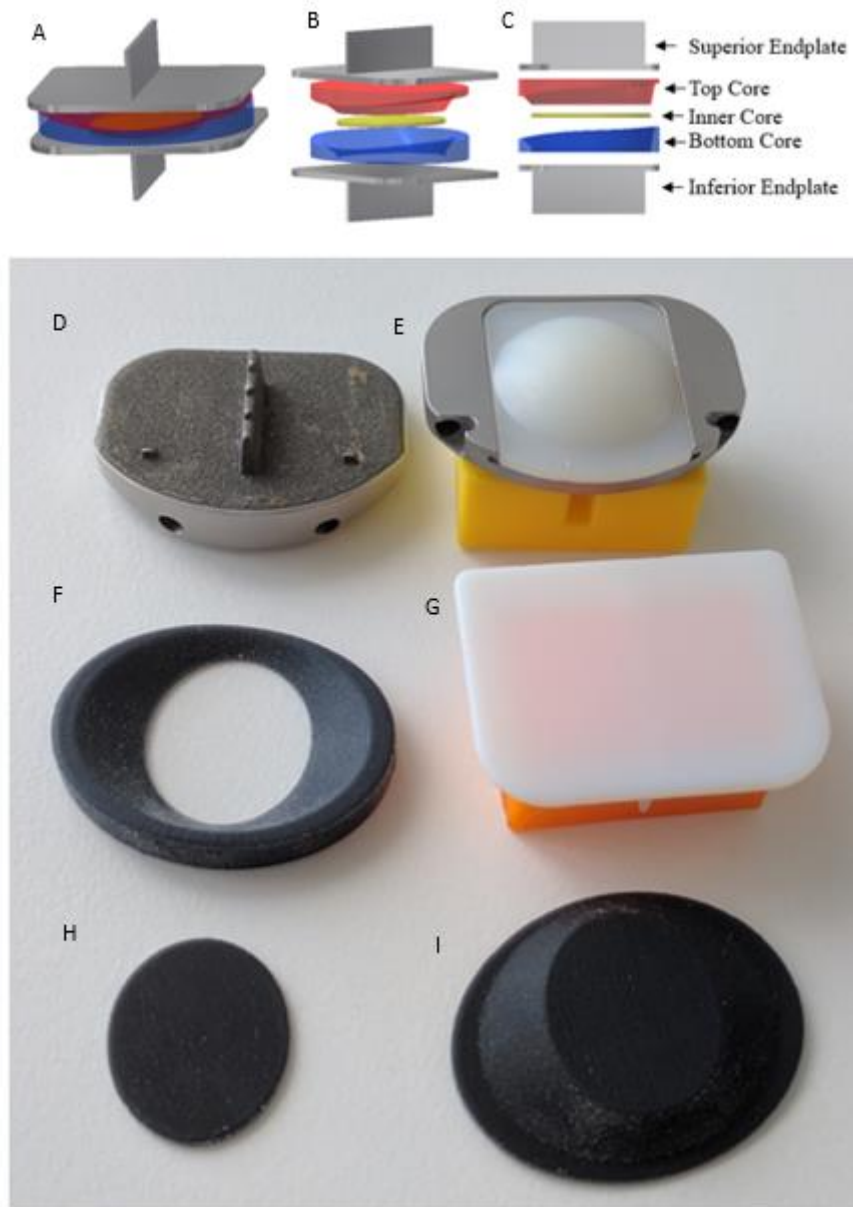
A CAD iteration of the final design chosen to proceed with the parametric analysis. (A) The assembled TDR and (B & C) exploded views illustrating the five different components of the design. (D-E) A picture of the Prodisc-L TDR components compared to (F-I) a 3D printed prototype of the Velodrome TDR concept components.
